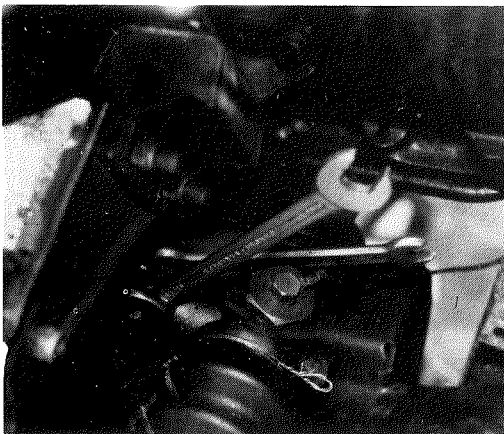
Back inside the engine bay, remove the lower universal joint coupling bolt.
